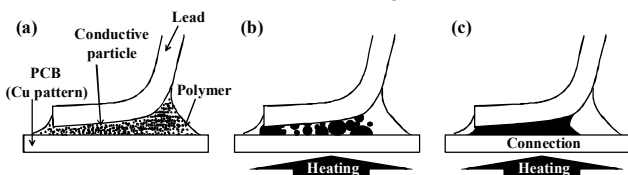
A schematic of QFP bonding mechanism using solderable ICA. (a) Initial condition, (b) coalescence and wetting behavior of LMPA and (c) completion of QFP bonding.
